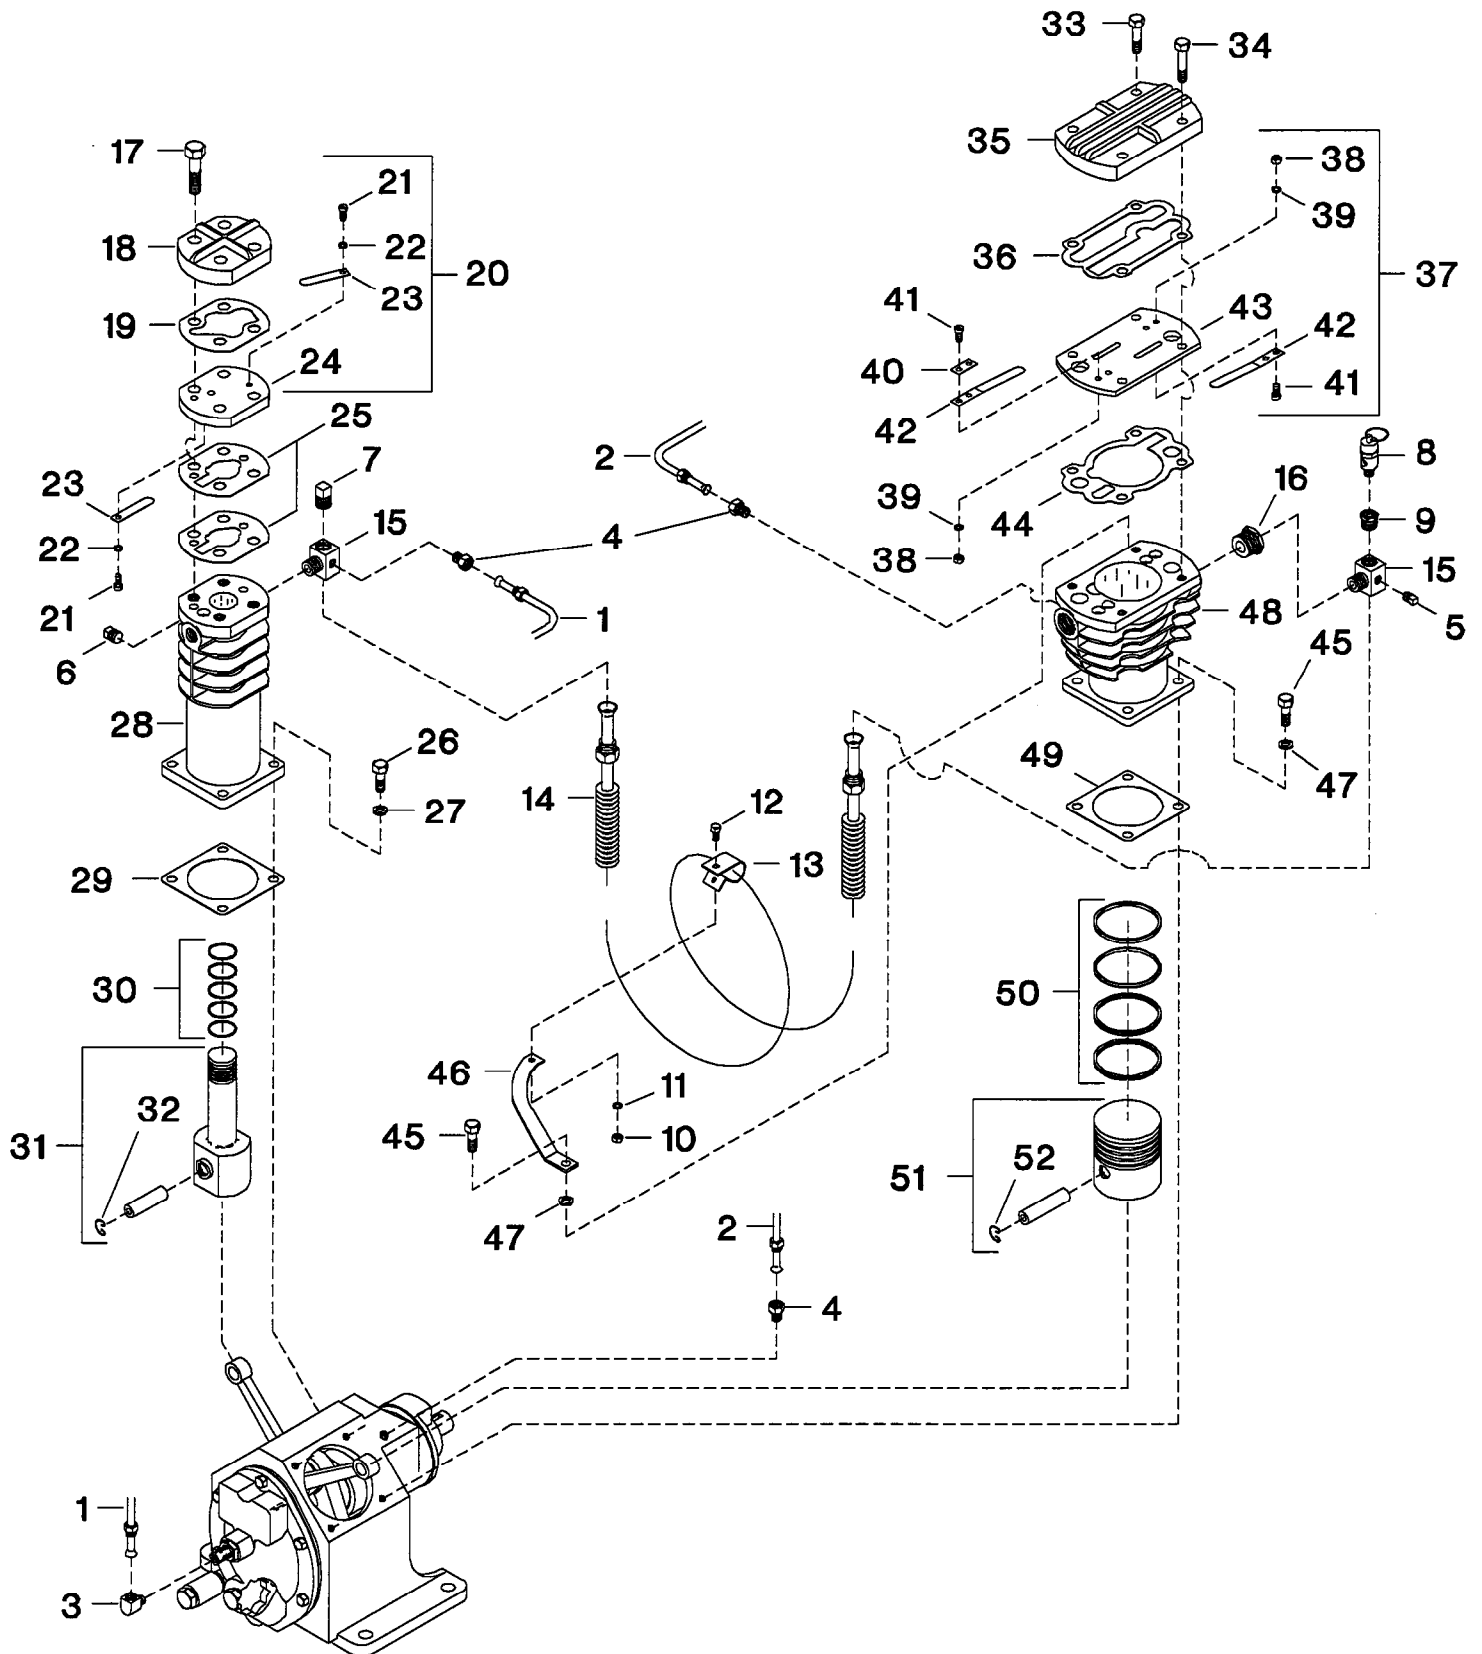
COMPRESSOR FRAME ASSEMBLY.
